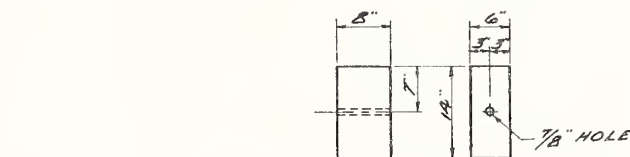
" x 8" x 14" WOOD BLOCK
